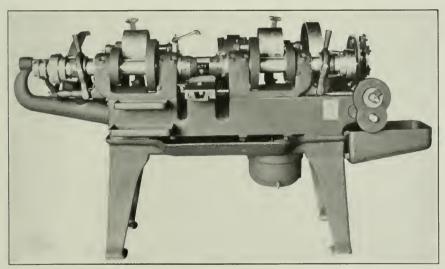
Cleveland Double-Spindle Plain Automatic
